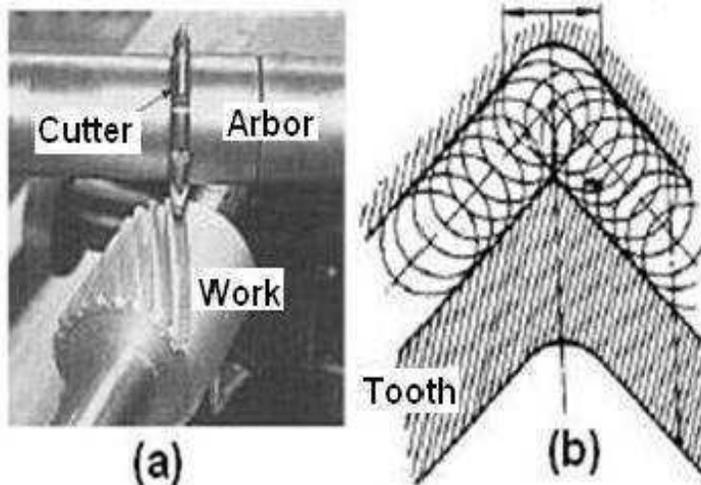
Producing external teeth by form milling used cutters (a) single helical and (b) double helical teeth milling
